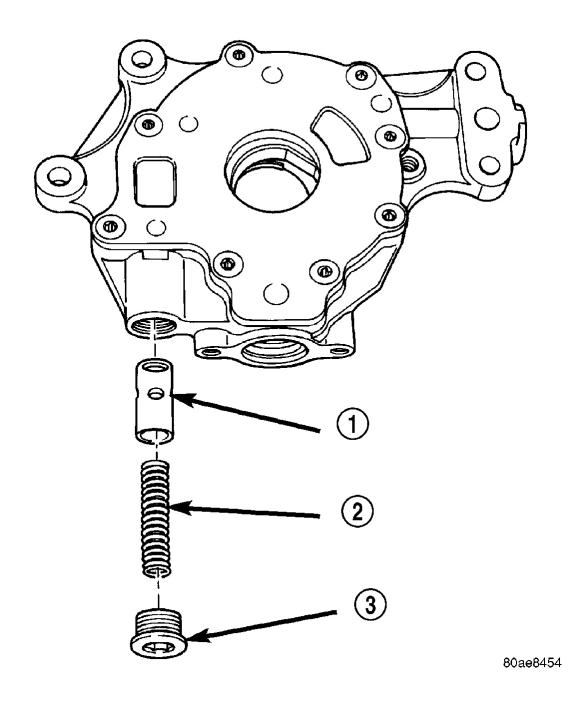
View Of Oil Pressure Relief Valve Courtesy of CHRYSLER LLC
